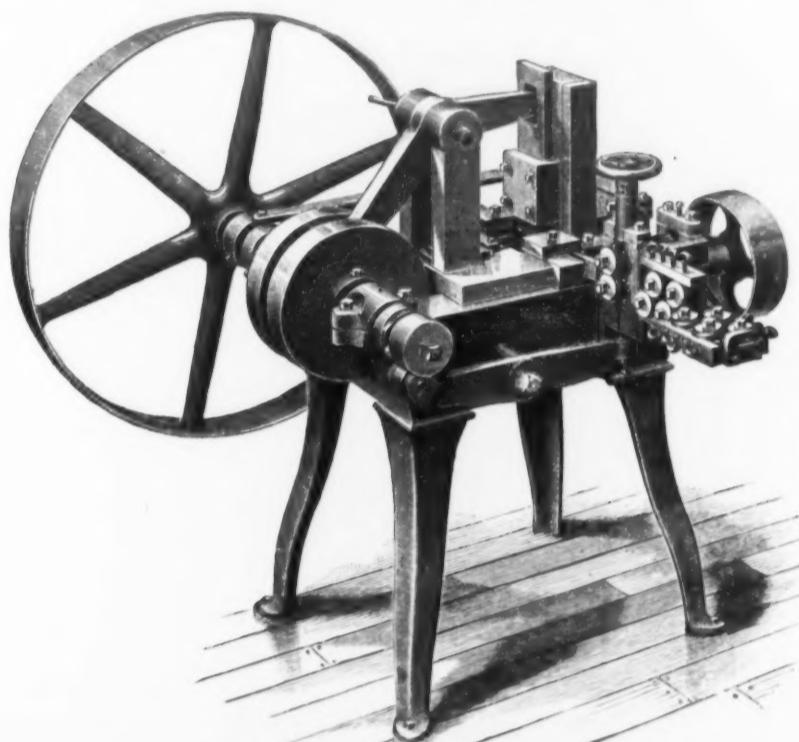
Wire-Forming Machine with Double Cam Motion.
